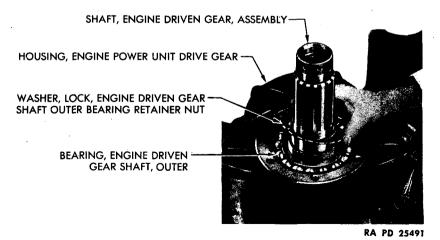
Installing Engine Driven Gear Shaft Outer Bearing
